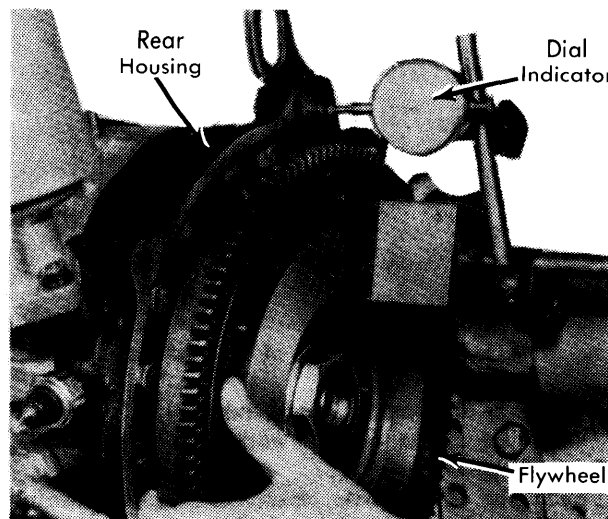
Measuring Eccentric Shaft End Play with Dial Indicator
